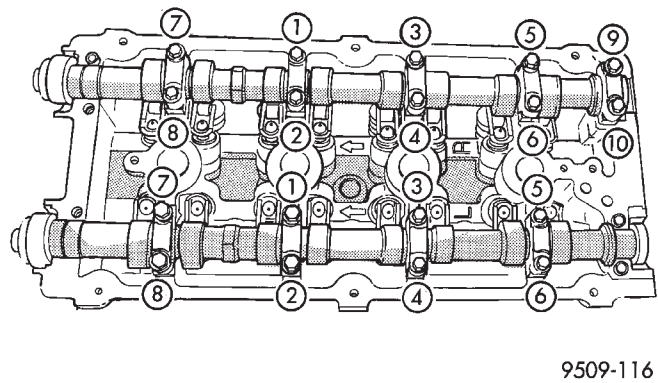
Camshaft Bearing Cap Tightening Sequence
